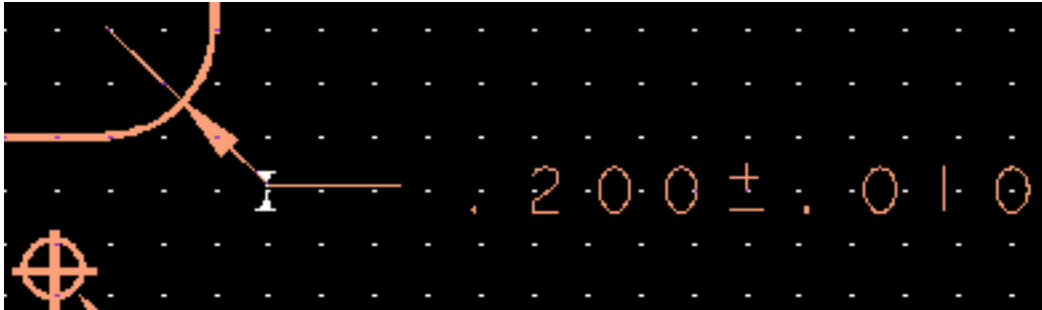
Locating the Drill Hole Vertical Dimension
